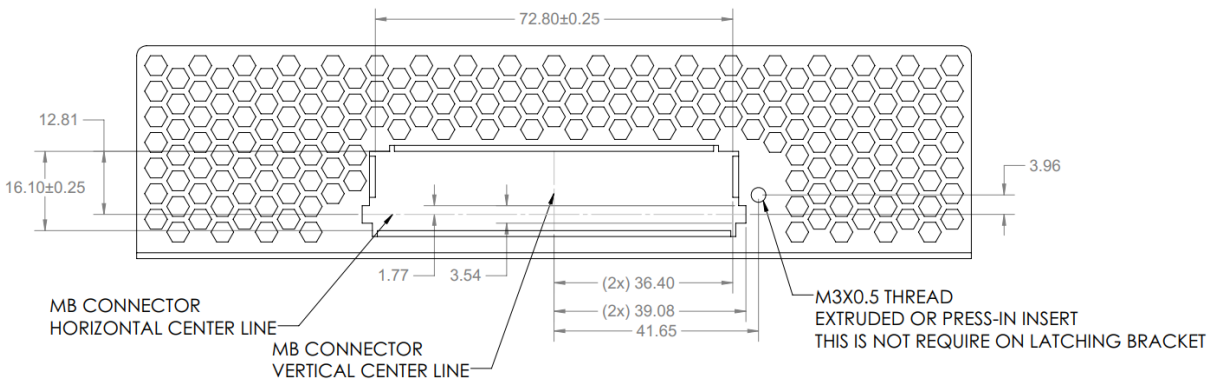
SFF Baseboard Chassis to Card Thumb Screw CTF Dimensions (Side View)
